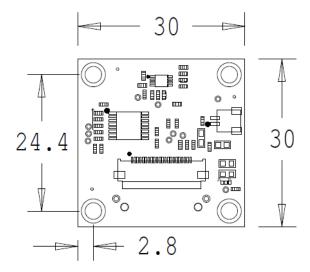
Rear View of e-CAM81\_CUONX Adapter Board Mechanical Dimensions
